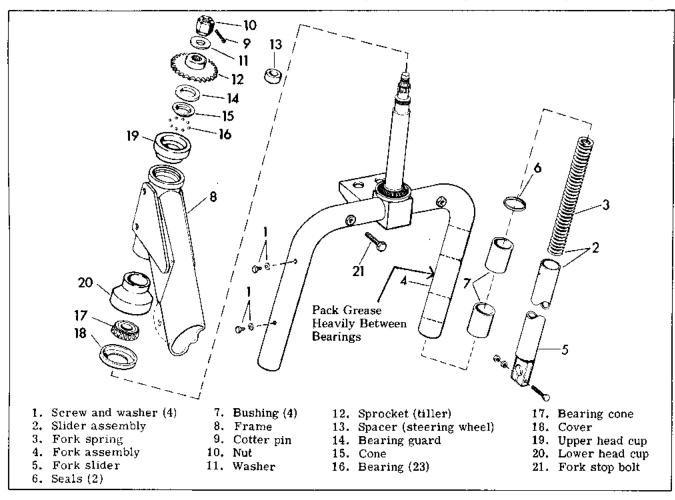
F-78. Front Fork 1969 and Earlier - Exploded View
